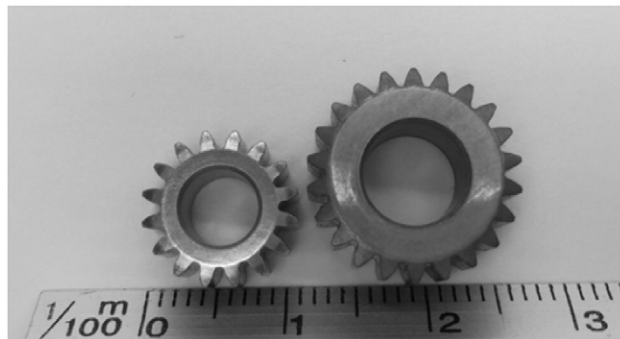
Photograph of the two studied spur gears. To the left is the smaller gear with 16 teeth (Gear A) shown and the larger gear with 22 teeth (Gear B) is shown to the right.
